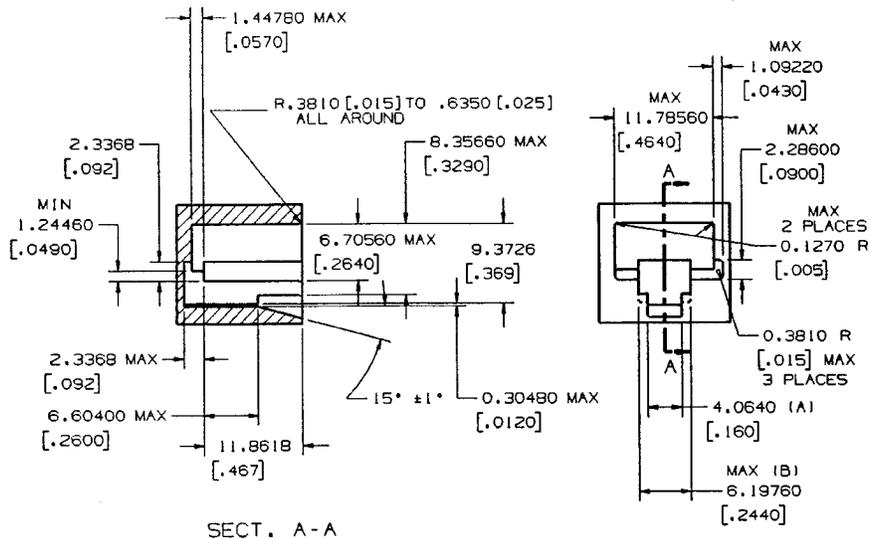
(i)(3)(i) - B POSITION KEYED PLUG
